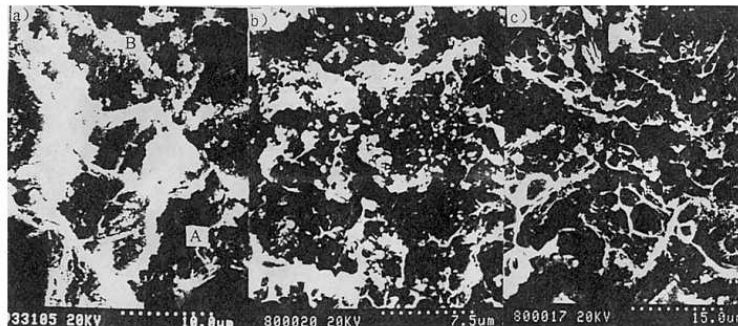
Effect welding temperature on fractograph of MMC-MMC, (a) 830 K, (b) 860 K, (c) 870 K.
